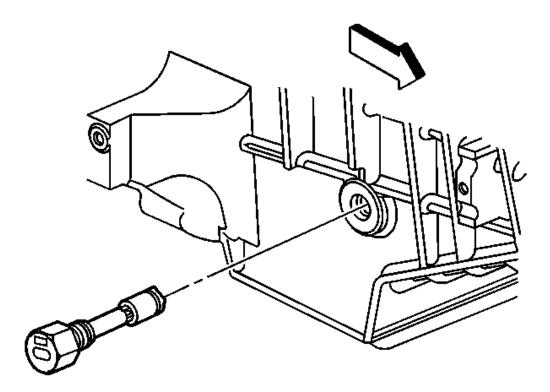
View Of Oil Level Sensor Courtesy of GENERAL MOTORS CORP.
